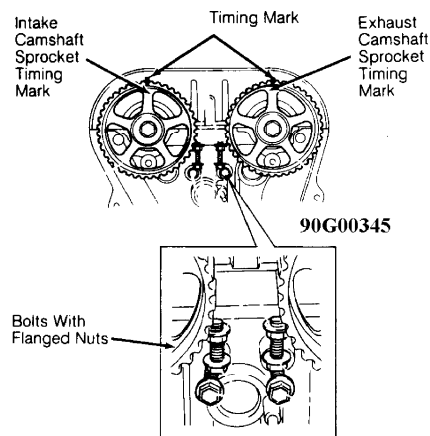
Securing Intake & Exhaust Camshaft Sprockets For Timing Belt Installation (DOHC)
